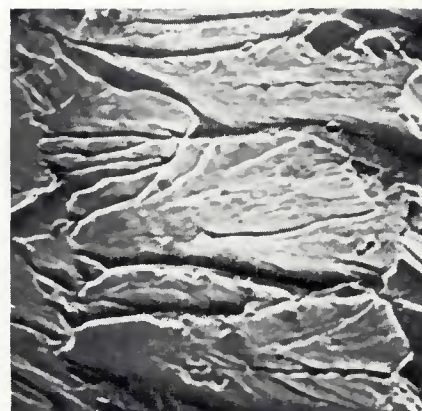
SEM fractograph of intergranular crack in weld metal from 2.4 mm (3/32 in.) diameter electrode L40 (weld no. 17). X1300 (reduced 32% on reproduction)
